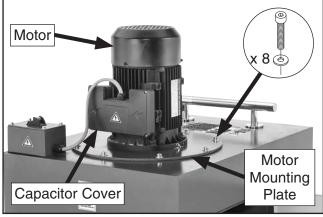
Cap screws secure the motor/impeller assembly to the cabinet.
